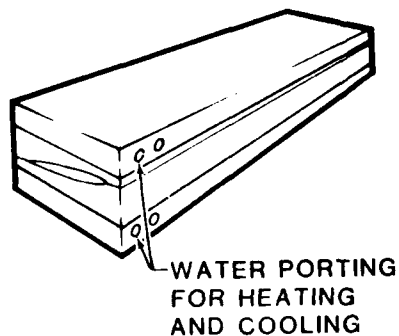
Sculptured Mold Inserts and Ported Platens for Water Heating and Cooling.
